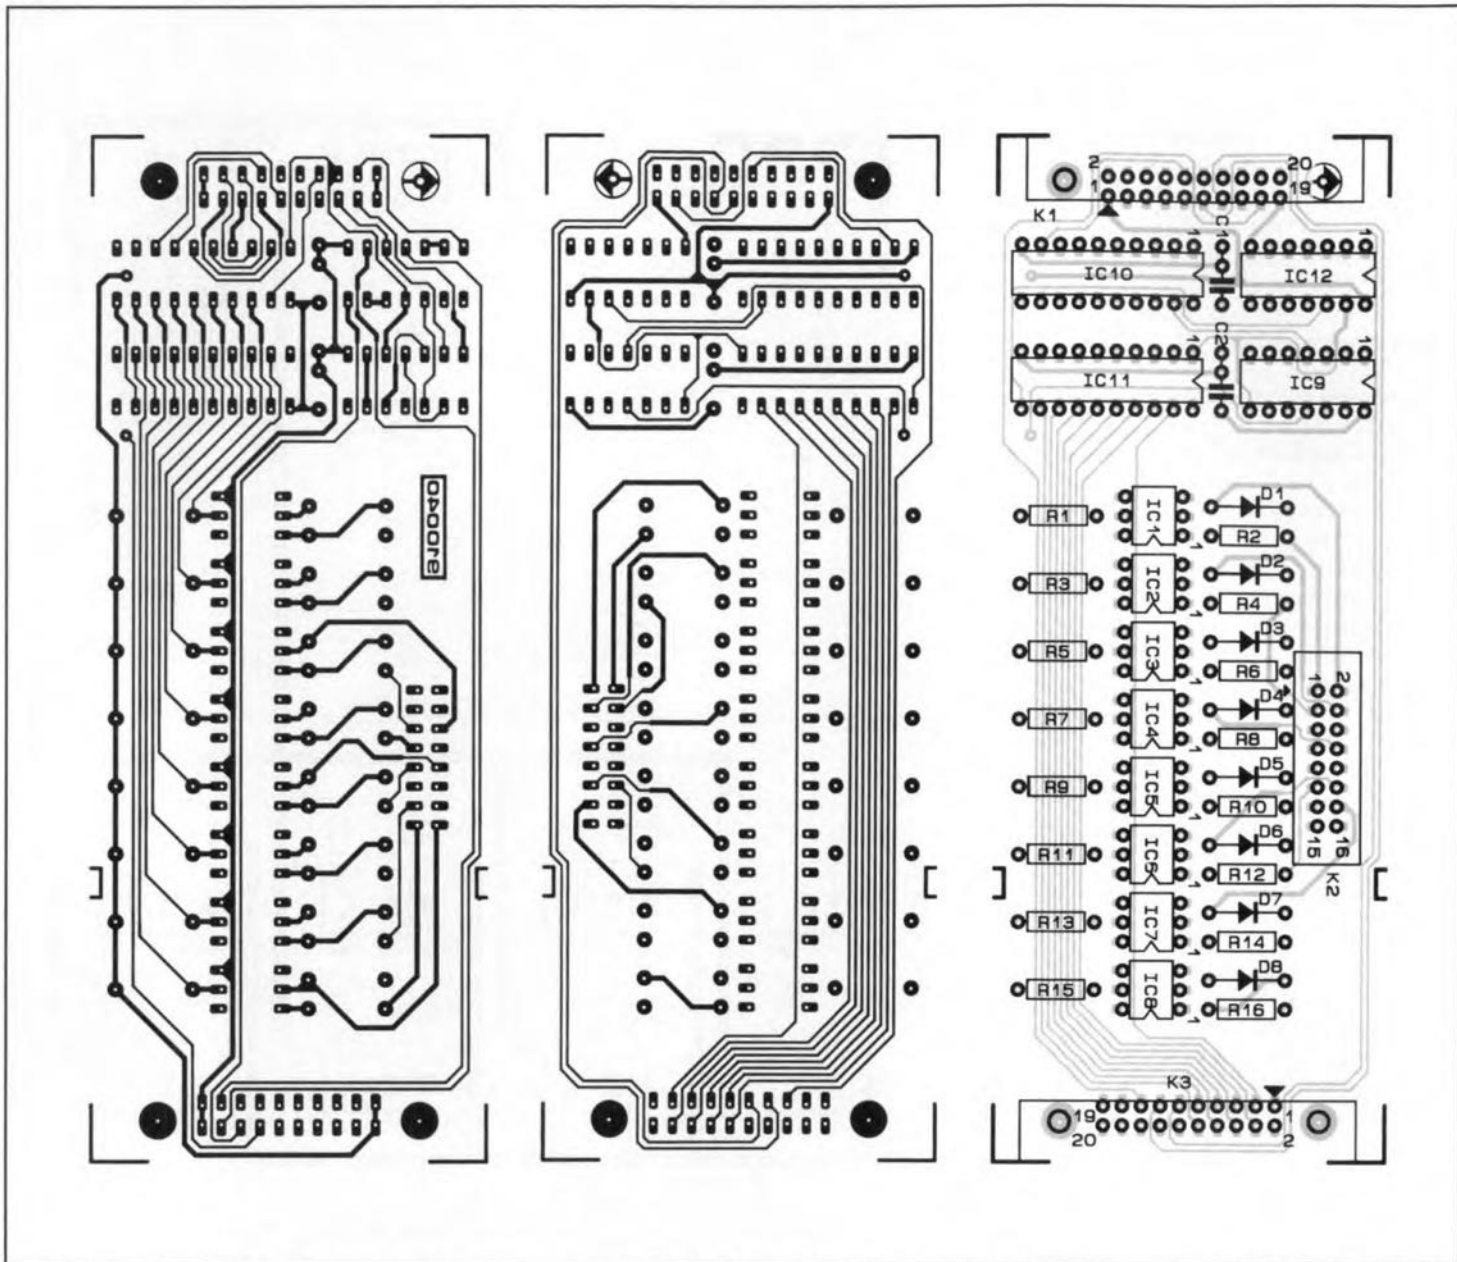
Track layouts (mirror images of the component side and the solder side) and component mounting plan of the double-sided PCB for the opto interface.
